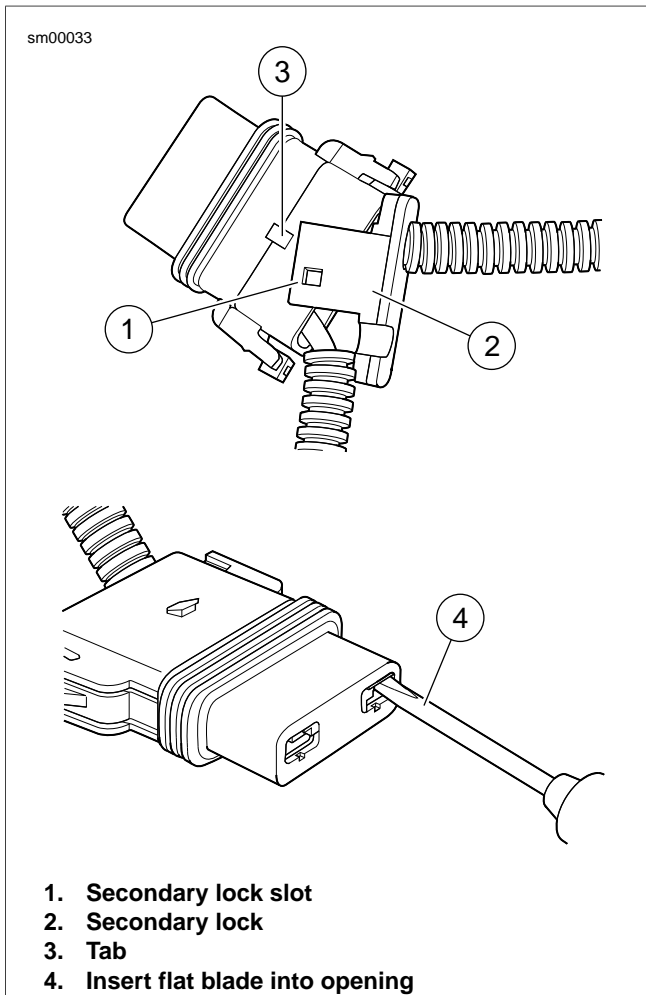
Delphi Main Fuse Housing: Remove Socket Terminals
